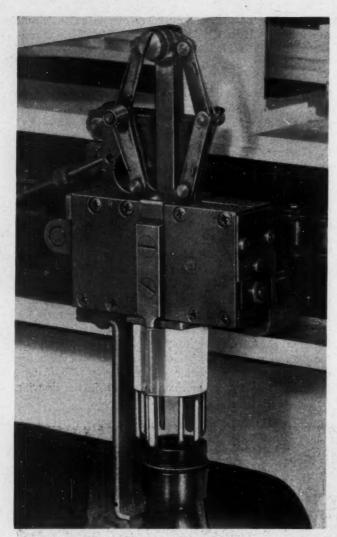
Applying head in position over bottle. Head has been rotated to vertical position and cam-operated stripper is pushing seal onto bottle
